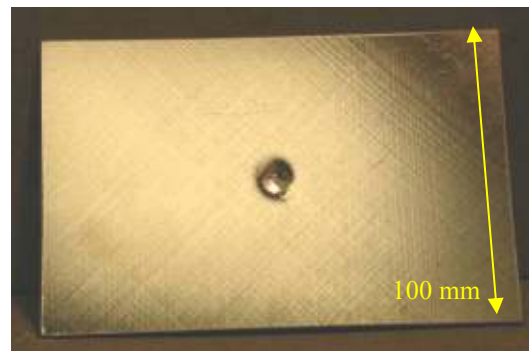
jagged edged, circular surface flaw produced by 20J / Ø20 mm impact on 17ply unfinished laminate
